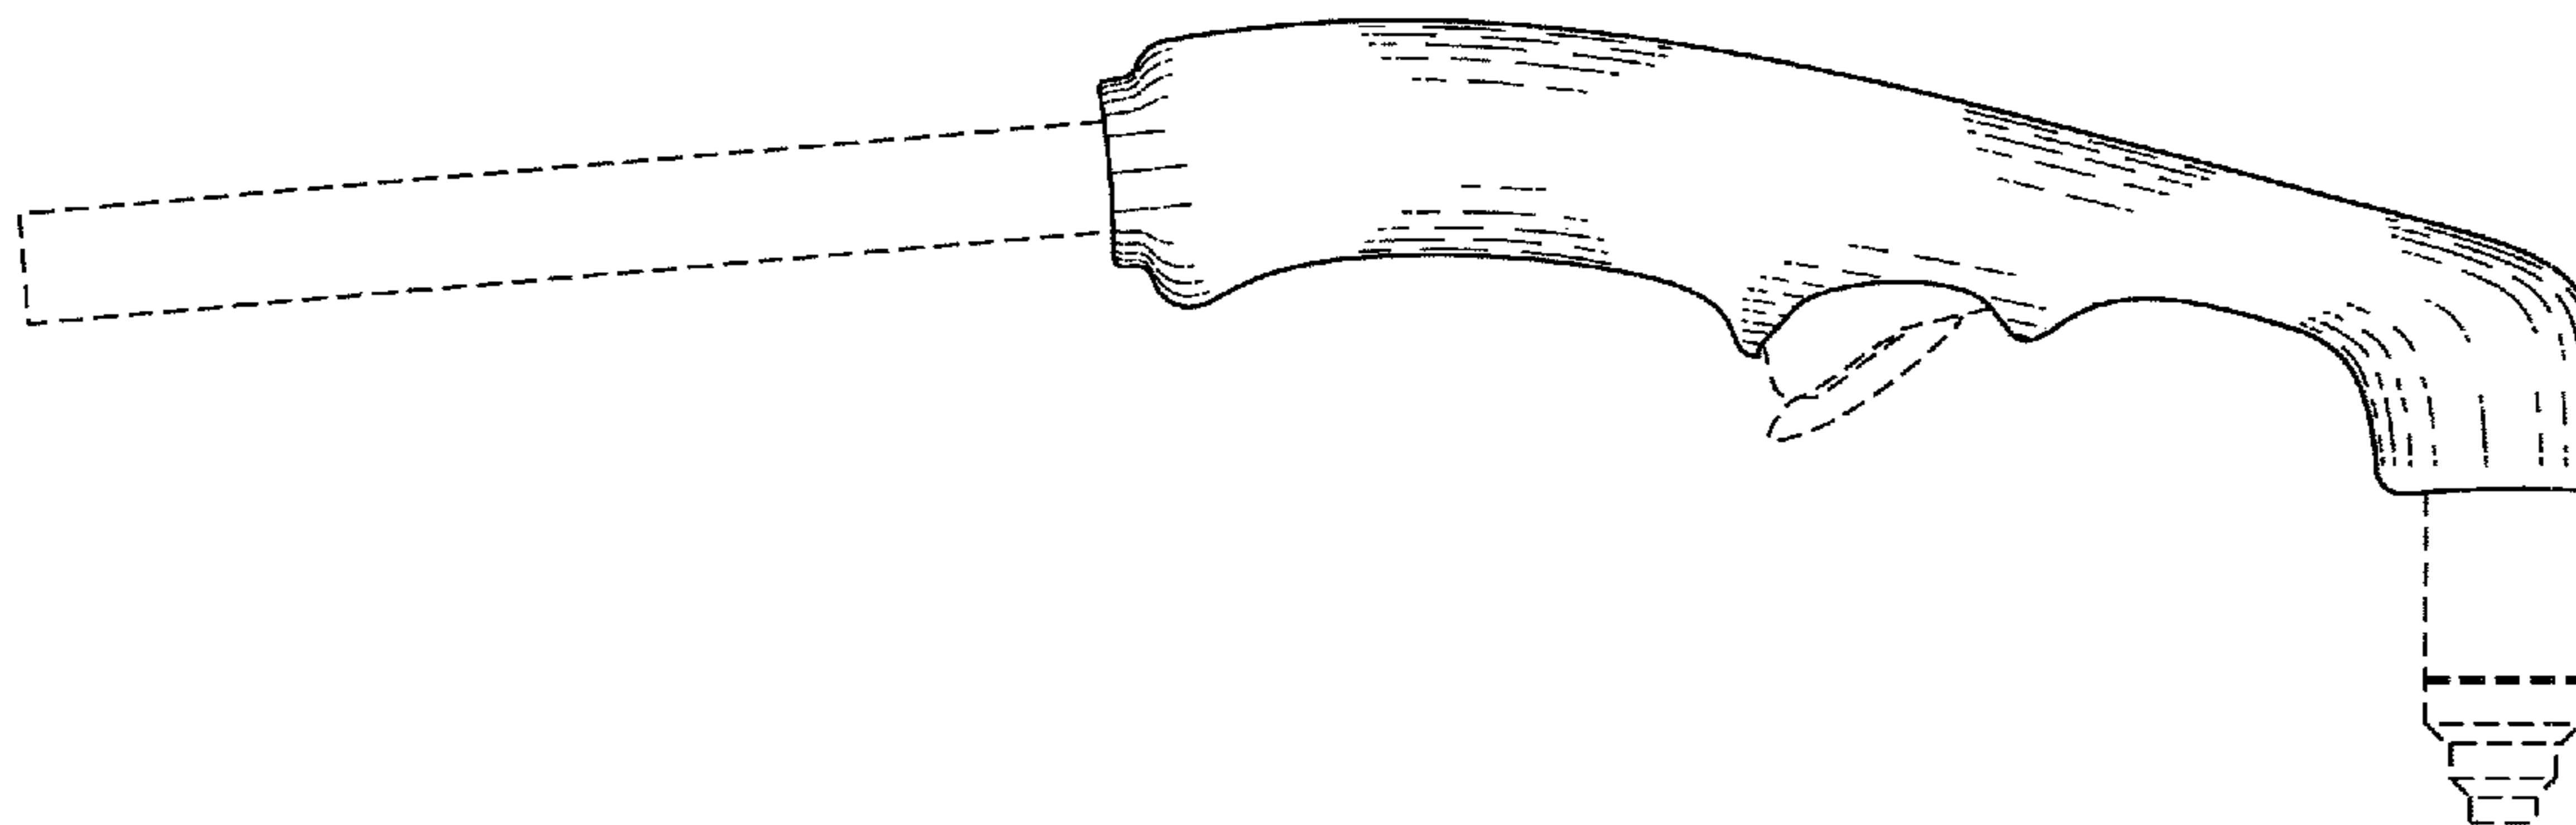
is a top view of the plasma hand torch of FIG. 1;
